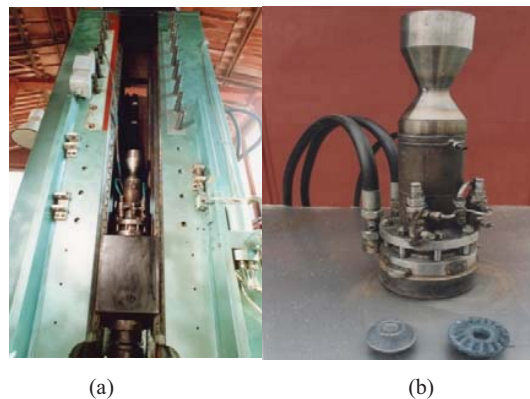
(a) Front view of rocket engine propelled hammer (b) Rocket engine and die forged conical gear
